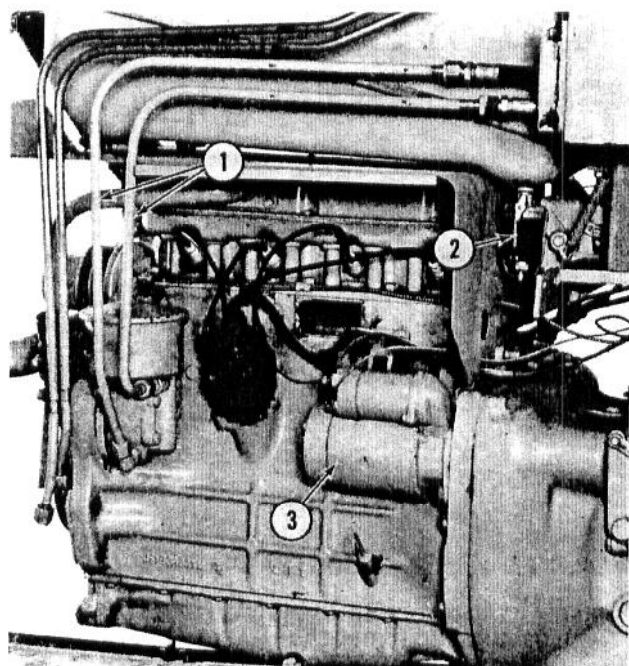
LEFT-HAND VIEW OF GAS ENGINE SEPARATED FROM FRONT AXLE SUPPORT
